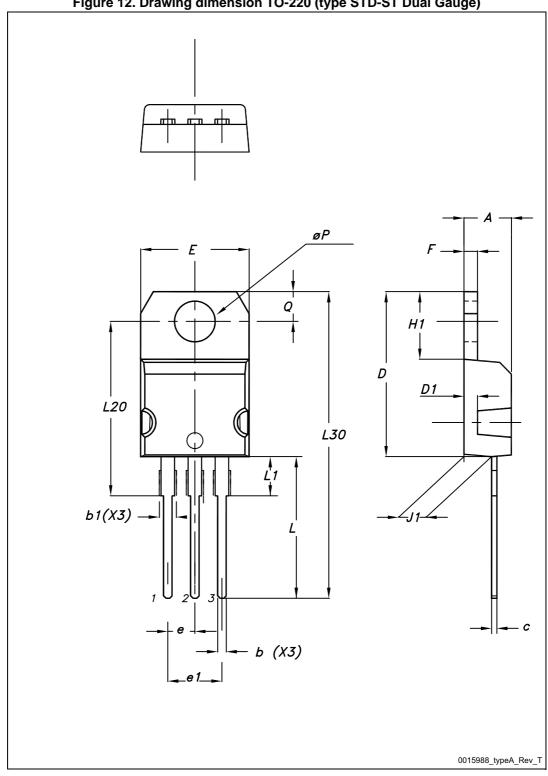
Drawing dimension TO-220 (type STD-ST Dual Gauge)
